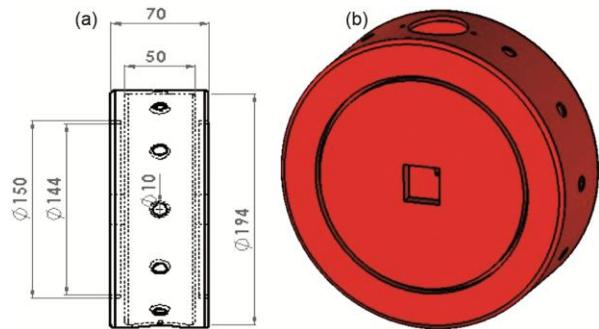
CAD of cylindrical fertilizer chamber (a) side view, and (b) isometric view of fertilizer chamber.
